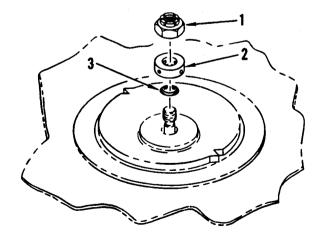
Removal; Aft Fuselage Tank (Sheet 7)
